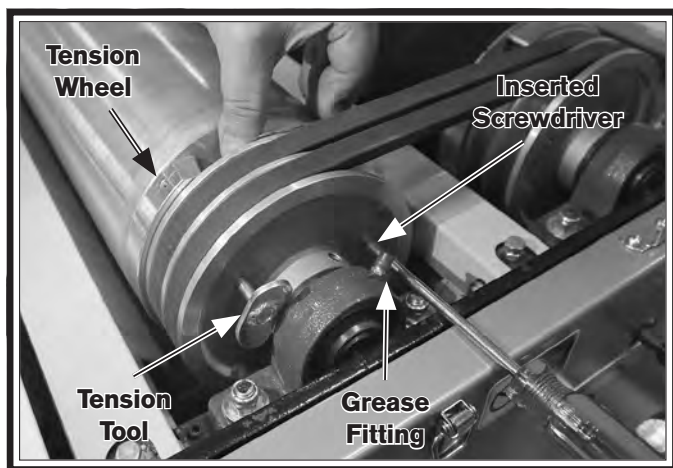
Example of pre-tensioning sandpaper tension wheel.
